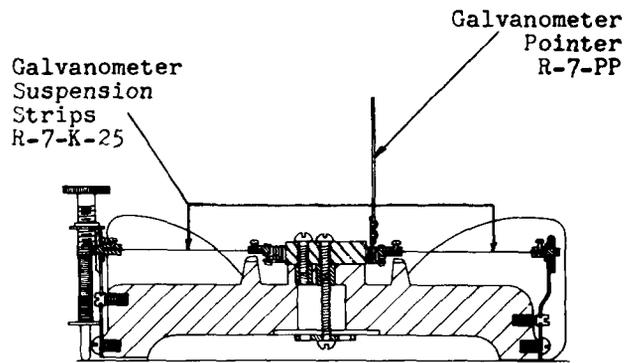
A - Galvanometer Pointer and Galvanometer Suspension Strips
